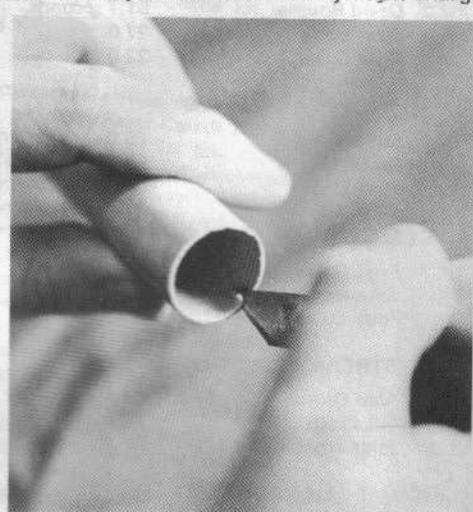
Start the "peel" by locating the inside seam and cutting the inside layer loose with a sharp knife where it meets the end of the tube.
